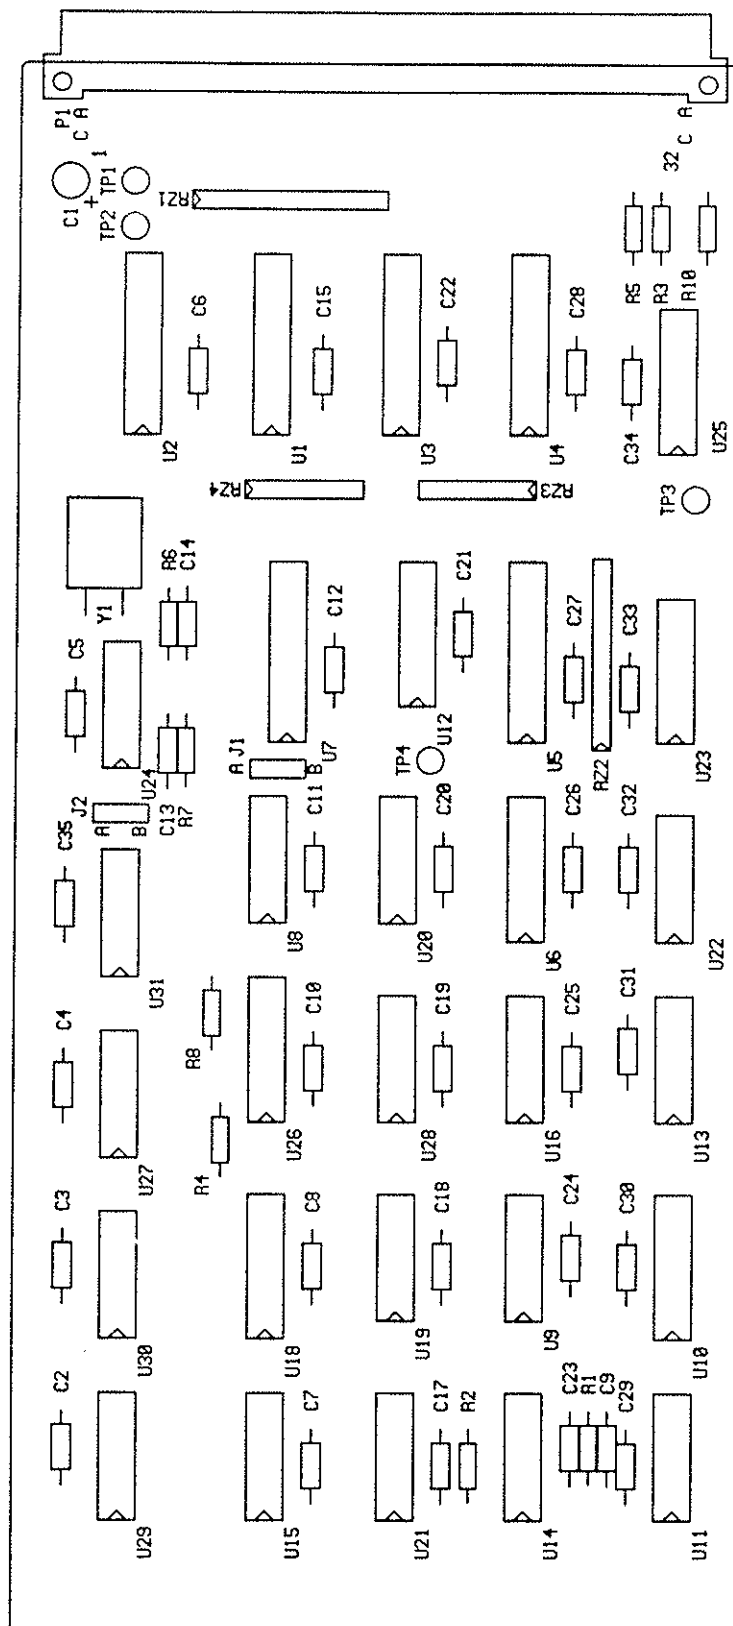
Component locator drawing, RFL 9700 digital transmitter modules
